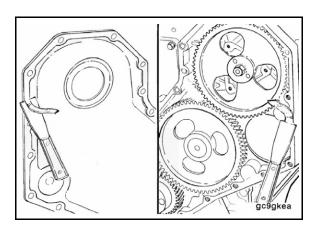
CLEAN THE GEAR COVER AND GEAR HOUSING GASKET SURFACE
